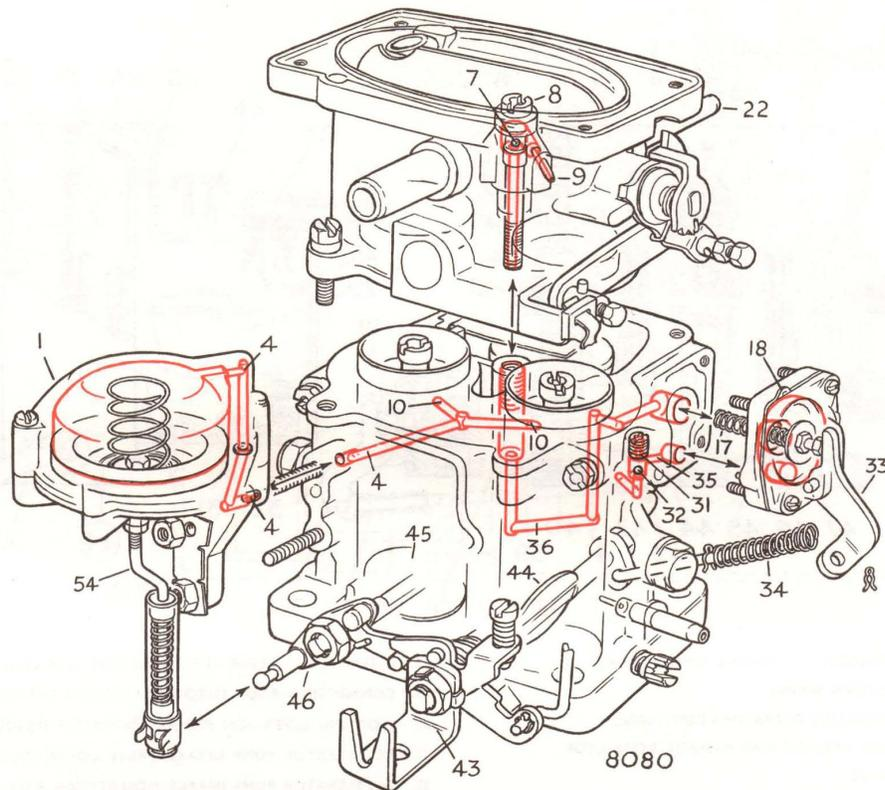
Solex B.32 P.A.I.A.S. carburettor — accelerator pump and secondary throttle operating unit passage ways
